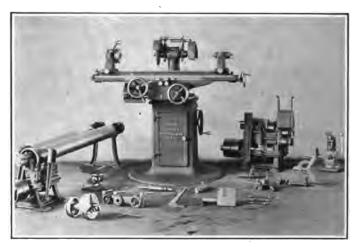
Cutter and reamer grinder together with the overhead works and a variety of attachments. (Courtesy Norton Co.)
